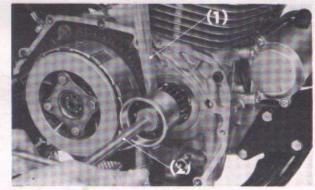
(1) Piece of soft metal bar (2) Lock nut wrench
